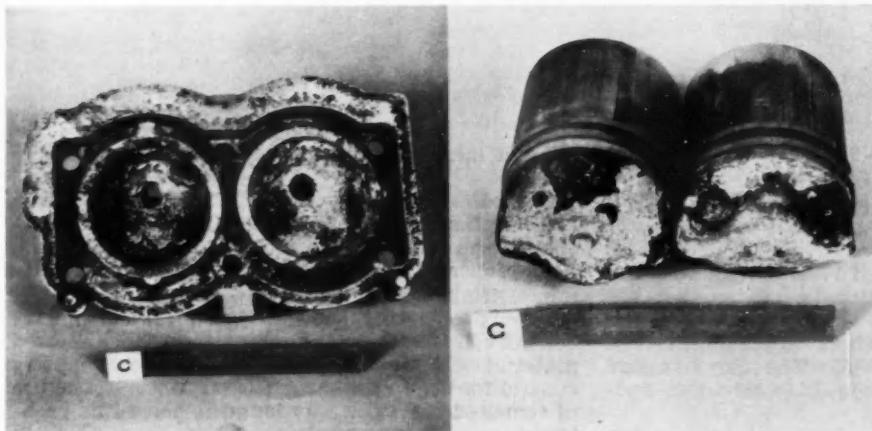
When a base oil without additive is used, the combustion-chamber deposit at the close of a 100-hr, full-throttle test run is about double that shown in Fig. 1.
